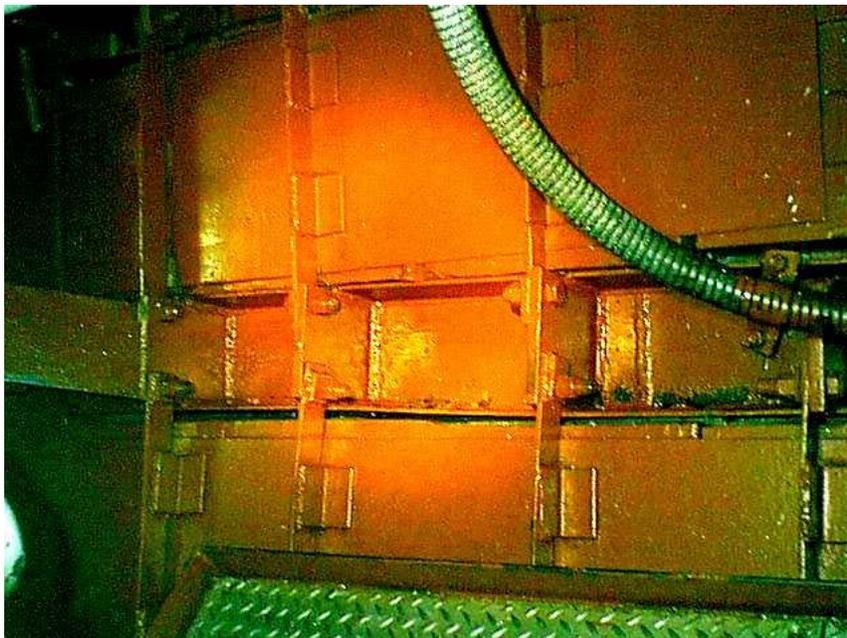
BALLAST FRAME 180 TO 188 PORTSIDE DETERIORATION AT LONGITUDINALS, LOOKING OUTBOARD/AFT
